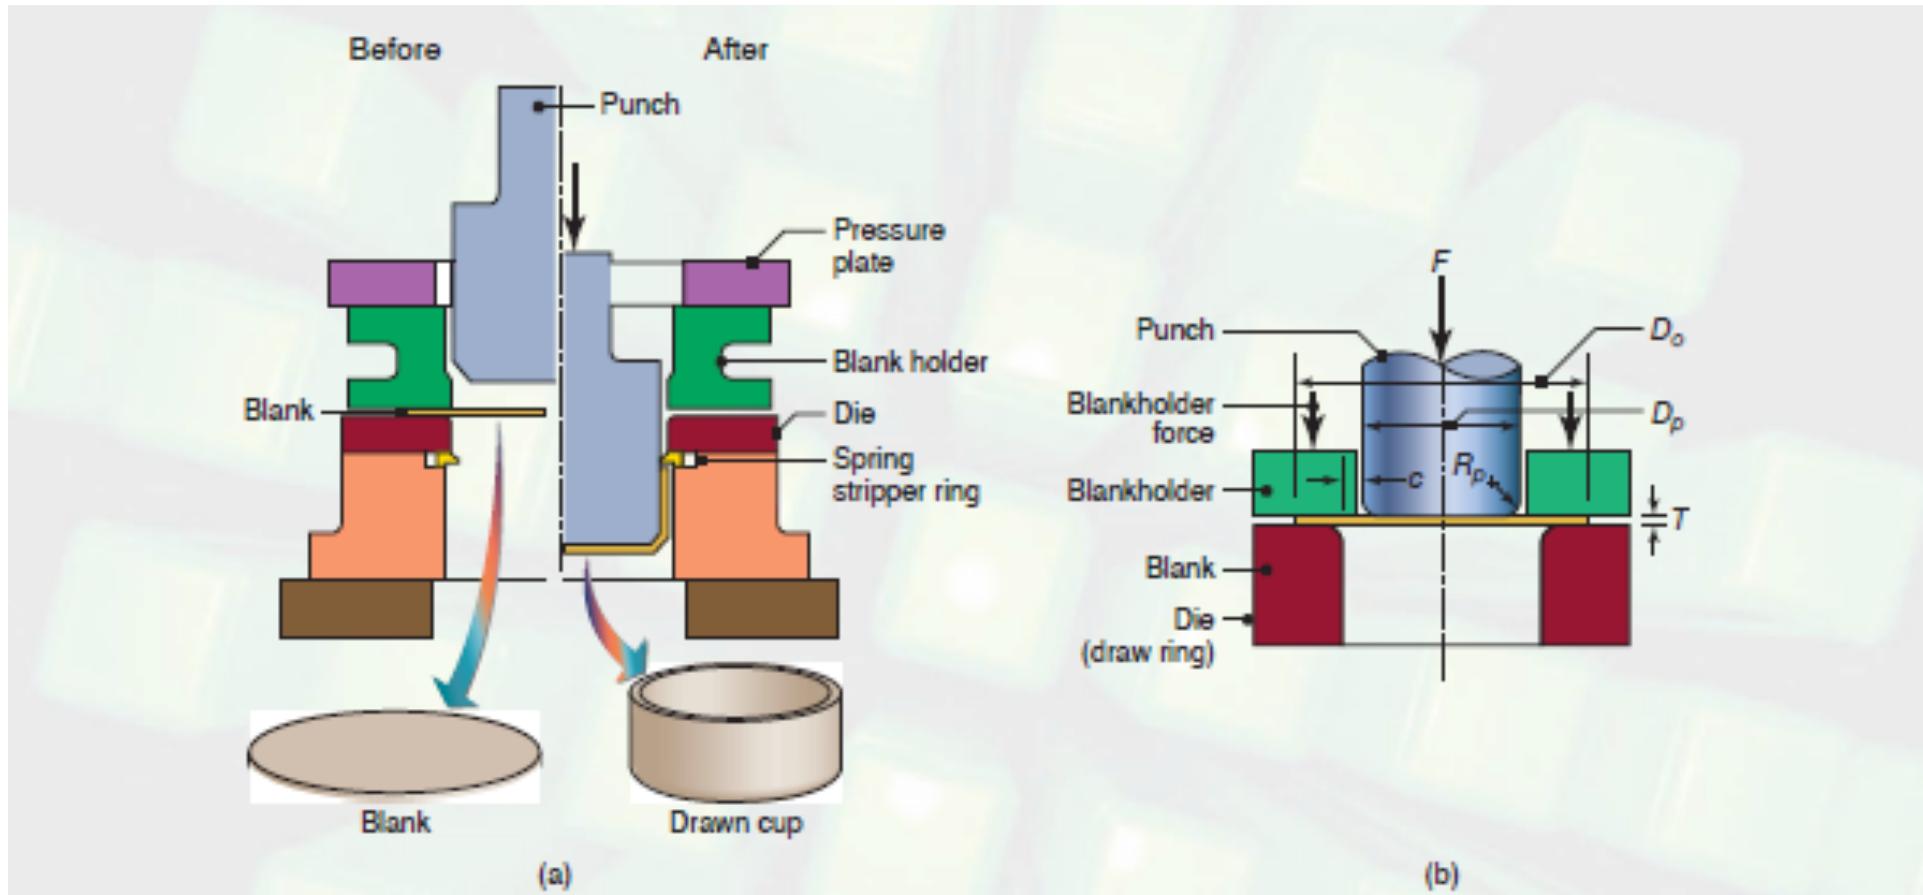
(a) Schematic illustration of the deep drawing process on a circular sheet-metal blank. The stripper ring facilitates the removal of the formed cup from the punch. (b) Variables in deep drawing of a cylindrical cup. Note that only the punch force in this illustration is a dependent variable; all others are independent variables, including the blankholder force.
